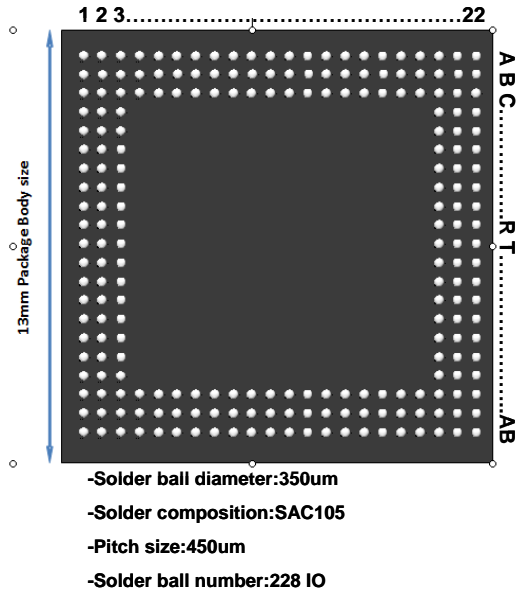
schematic drawing of BGA assembly showing the solder joint layout.
